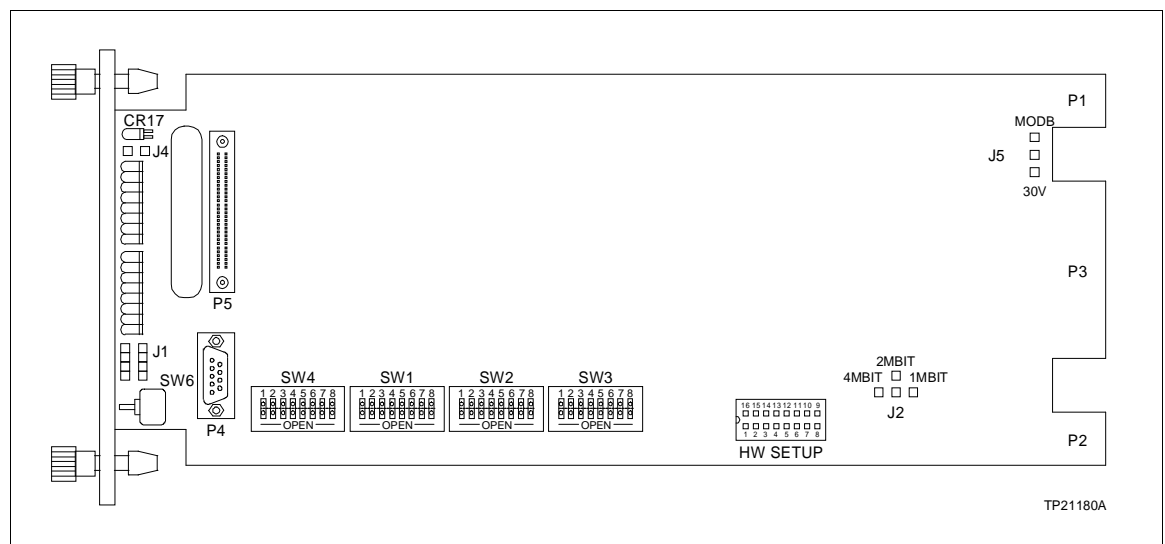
INIPT02 Dipswitch and Jumper Locations
